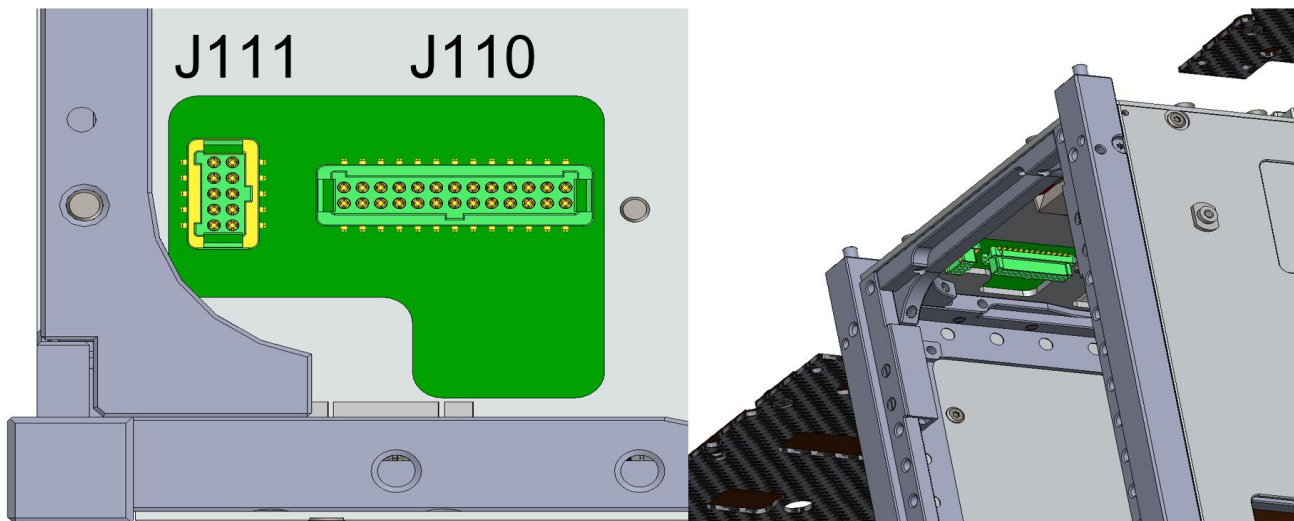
Left: Bottom view of Connect PCB (interface to EPS and SADA-50) Right: position inside spacecraft
